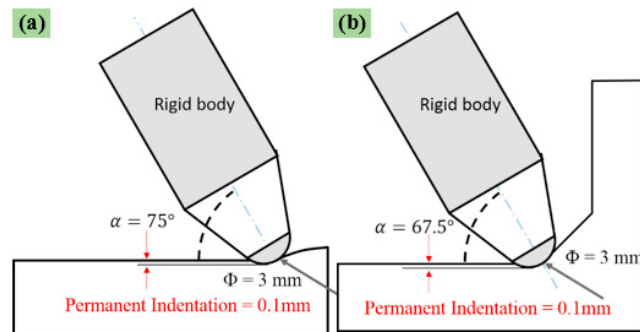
Pin tool position and indentation: (a) butt joint, (b) T-joint
